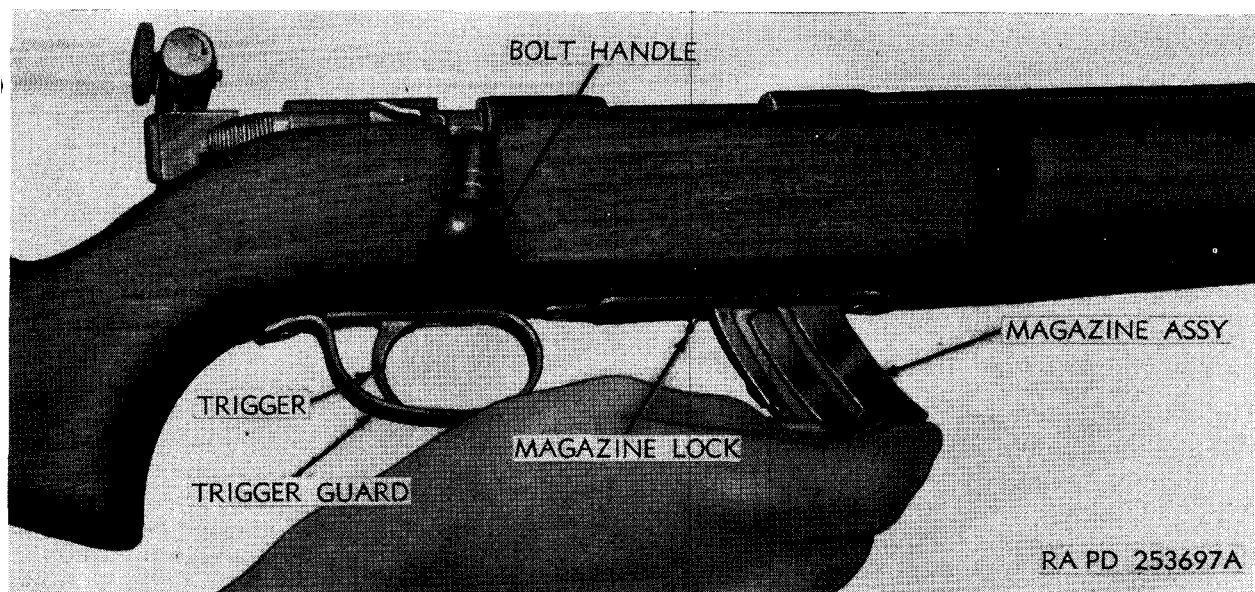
Installing or removing magazine assembly (Remington rifle M513T).
